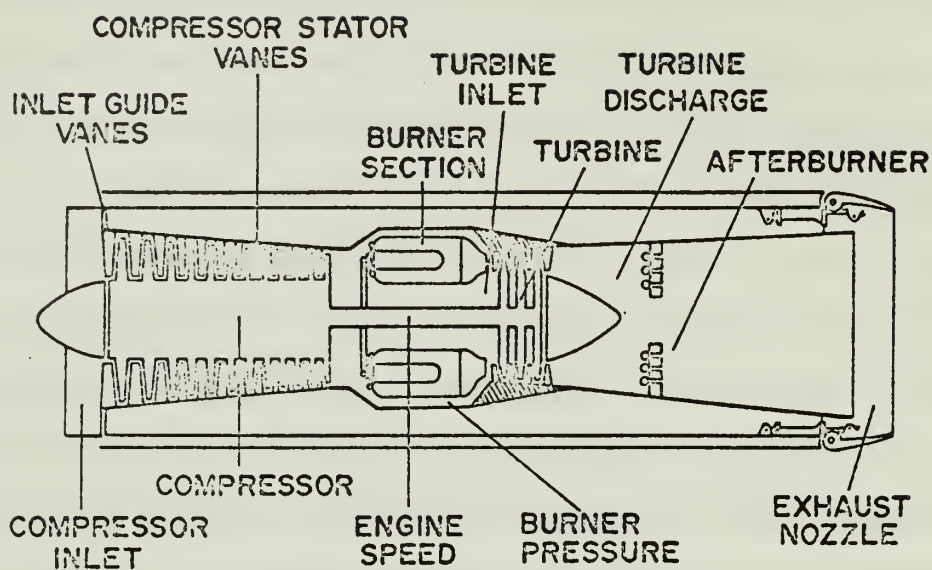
TYPICAL AFTERBURNING TURBINE ENGINE
